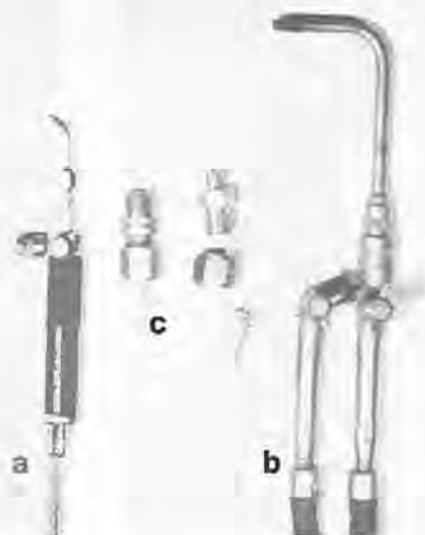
The Little Torch. 4b. The Hoke Torch. 4c. Fittings for attaching torch hose to regulators. NOTE: Fittings on left are for acetyline and are grooved to indicate left-hand thread.
